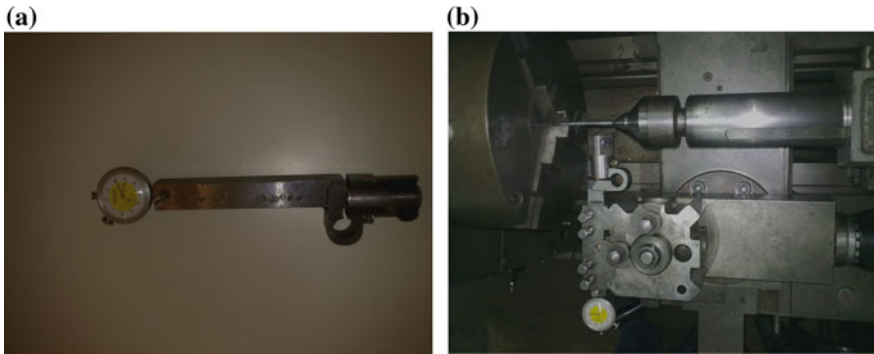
Schematic photo of the a calibrated roller burnishing tool, b burnishing process
